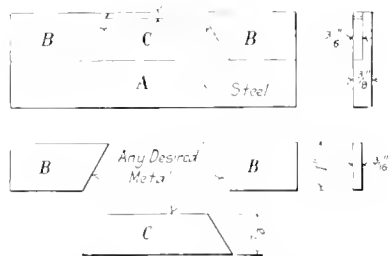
CENTRIFUGAL TYPE OF BLADE FOR USE IN ROTARY COMPRESSOR WITH ECCENTRIC ROTOR
